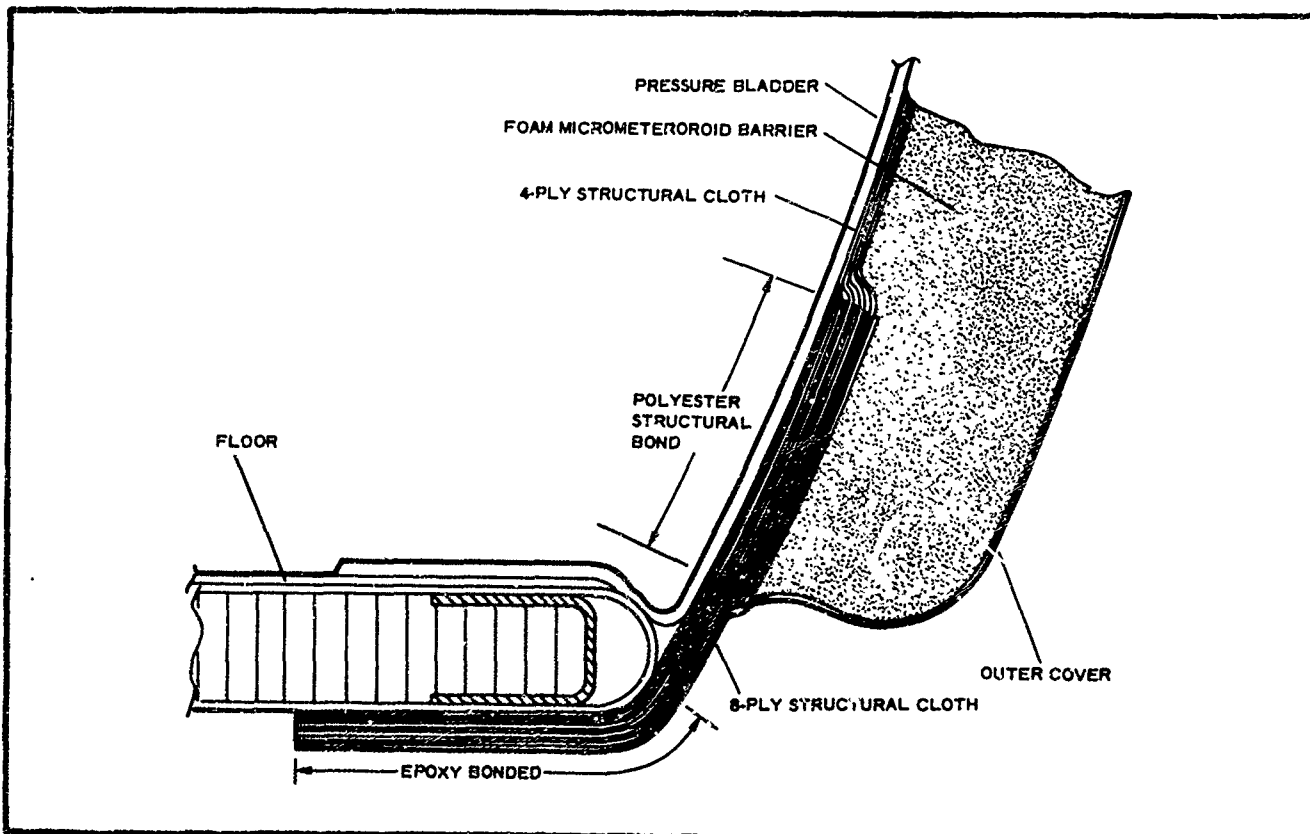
Structural Joint Between Expandable Wall and Rigid Floor
